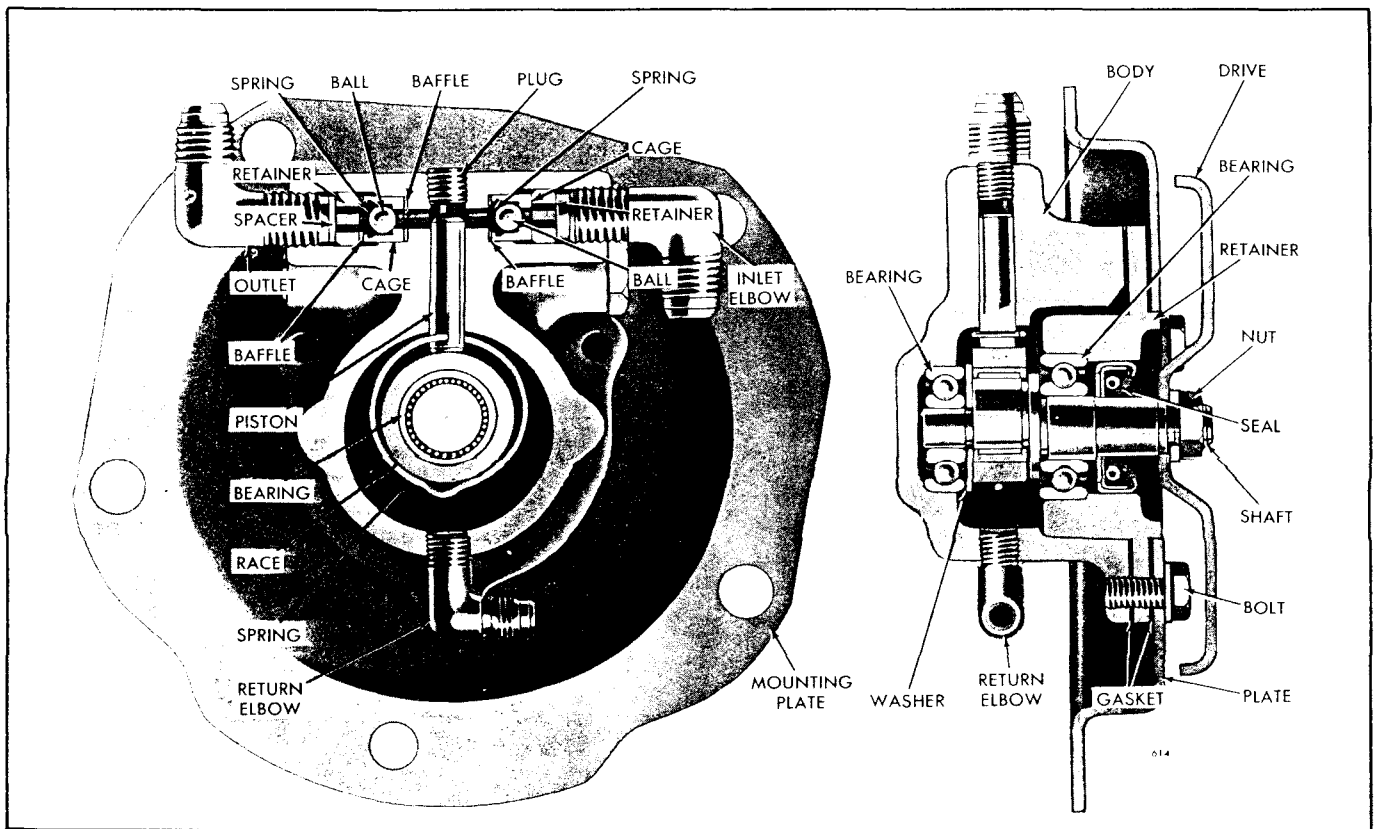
Direct Engine-Driven Hydrostarter Charging Pump
